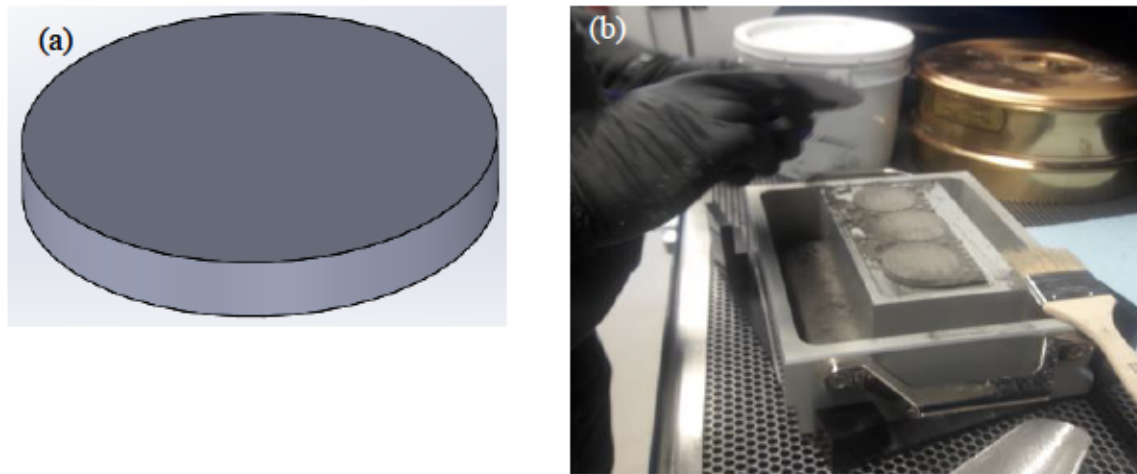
(a) Solidworks design for disc target, diameter 55.88 mm, thickness 6.35 mm, (b) 3D printed 316L SS sputtering targets.
